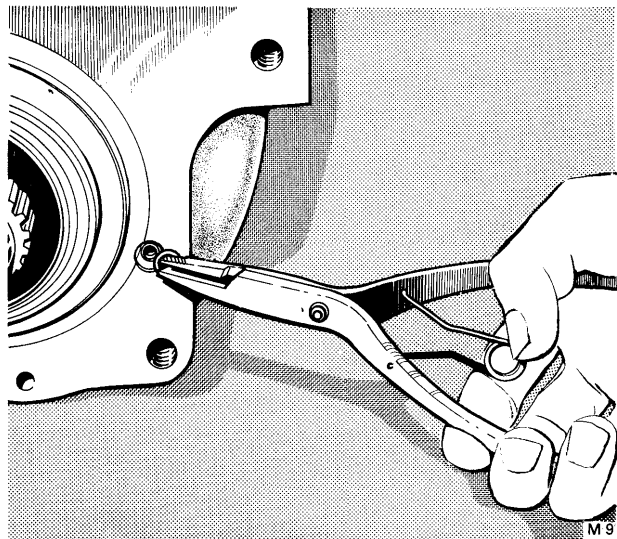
REMOVING THE PUMP LOCATING WASHER
